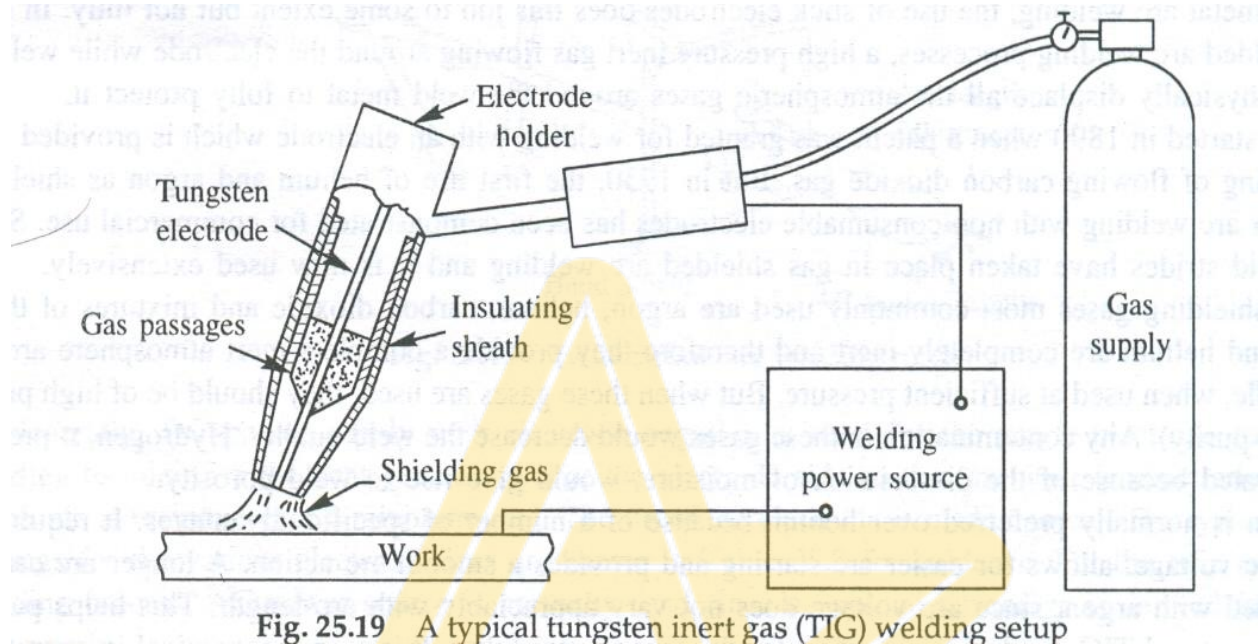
A typical tungsten inert gas (TIG) welding setup
